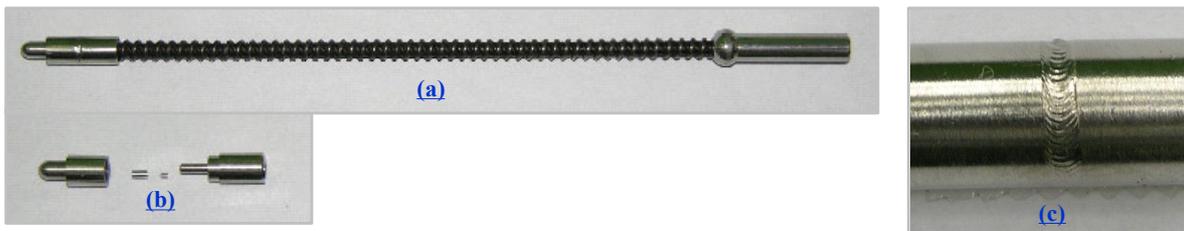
Photographs of type II source holder; (a) Dummy assembly, (b) elements of source part, (c) welding area of source capsule
